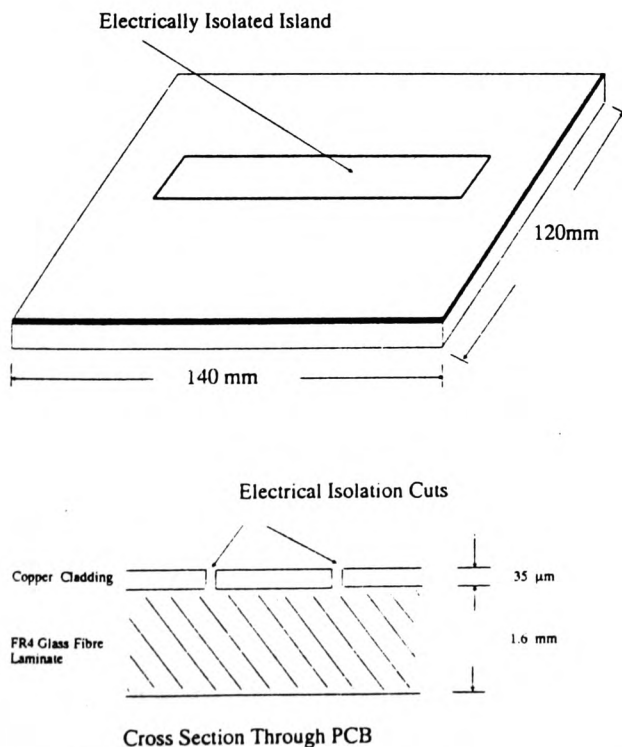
The layout of the PCB plate used in the heat transfer experiment.
